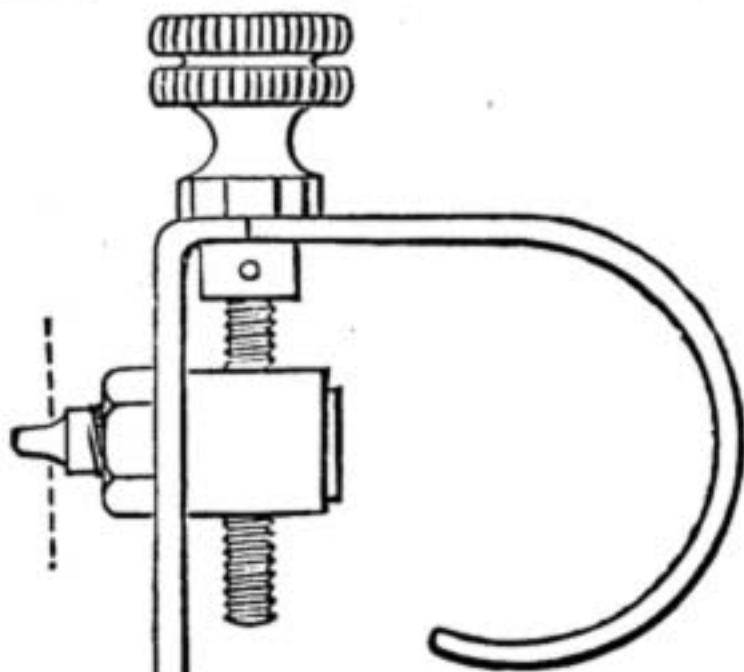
Simple Form of Adjustable Index Spring: Side View.
